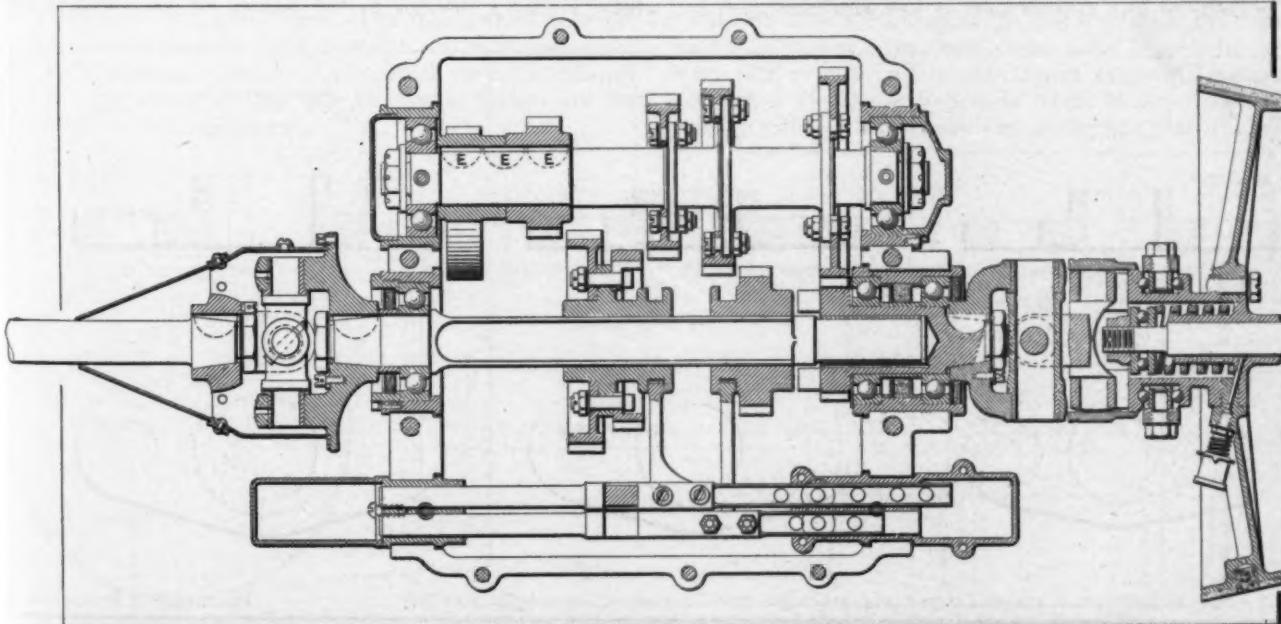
Pierce-Arrow transmission gear and clutch assembly, with pressed steel housings over joints
